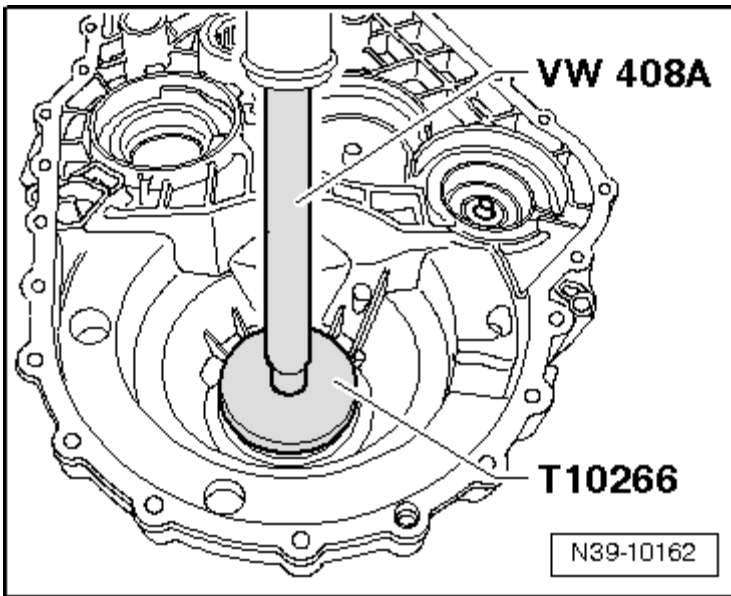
Installing Outer Race/Tapered Roller Bearing Into Clutch Housing
